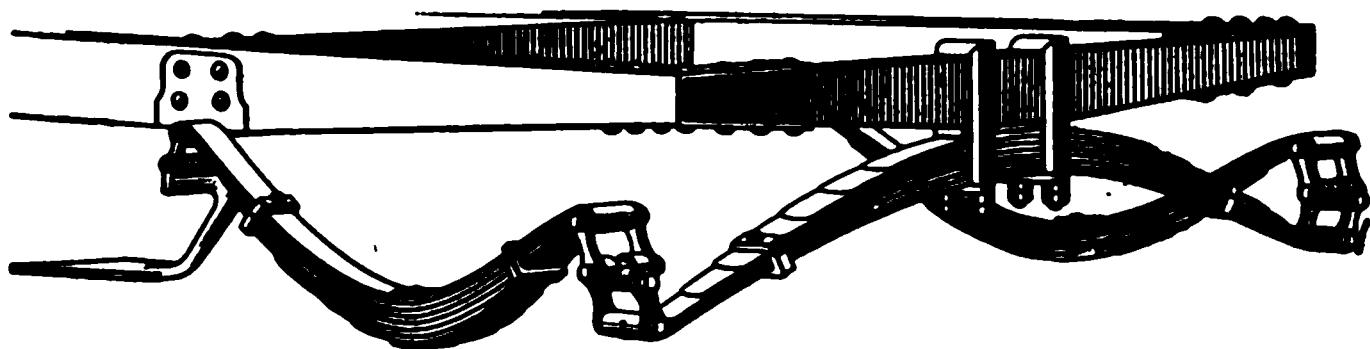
Three-point suspended spring, or platform spring, one of the latest and most conspicuous improvements in spring suspension designs.
